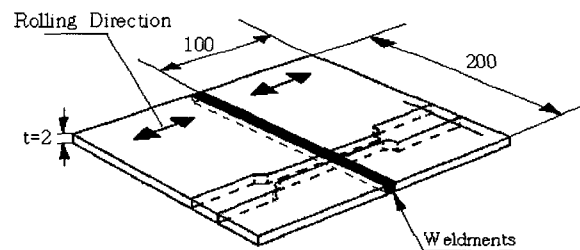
The weld coupon and the extraction of the transverse-weld tensile specimens.
